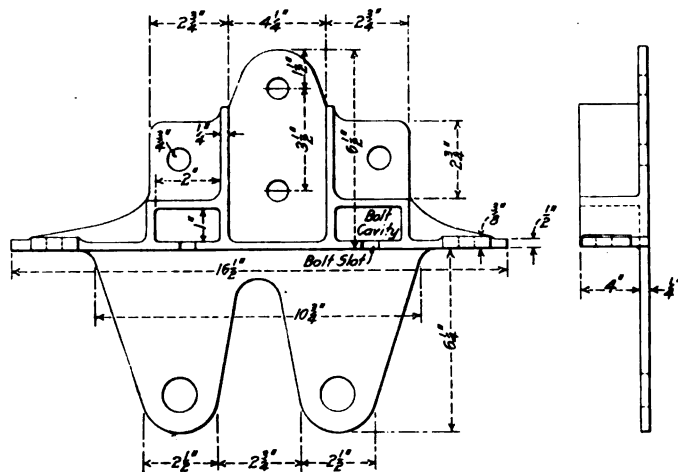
Stock Car Bottom Side Post Casting Showing Method of Applying Vertical Bolts.
